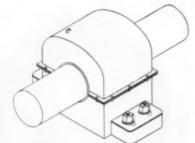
Simple shroud or sheet metal box can keep contaminants out of bearings.
